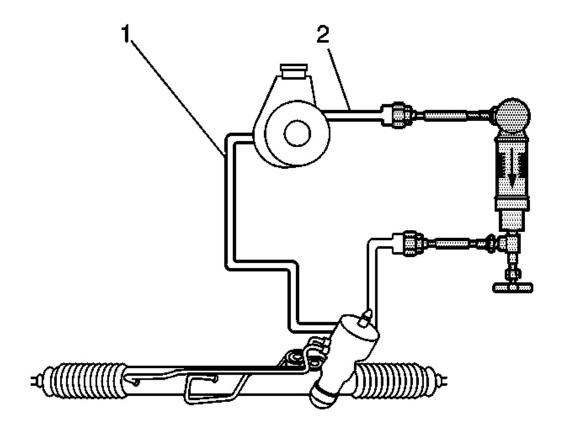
Testing Rack and Pinion System Pressures Courtesy of GENERAL MOTORS CORP.
